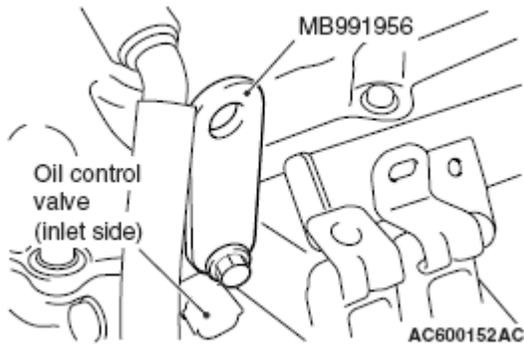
Identifying Special Tool MB991956 And Oil Control Valve
